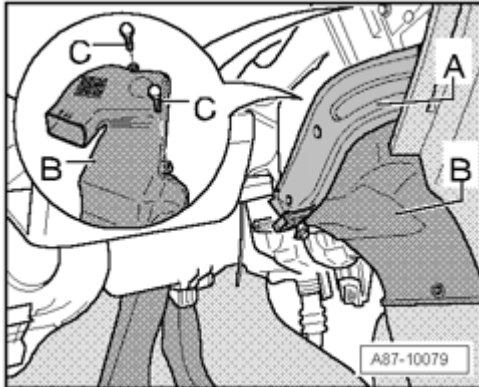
Identifying Instrument Panel, Bolts, And Footwell Vent
